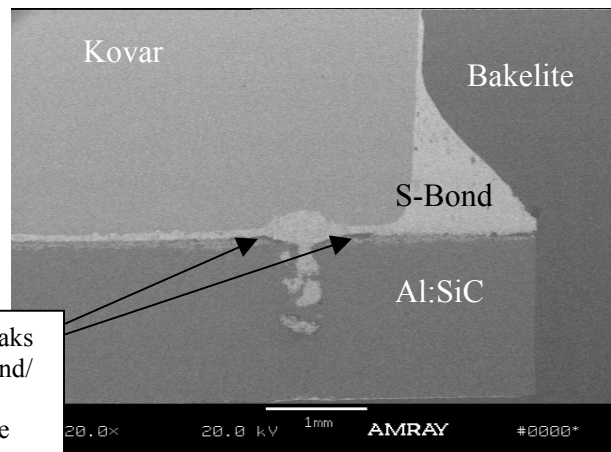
Al:SiC/Kovar® joint in an electronic package assembled using S-Bond™ 220.
